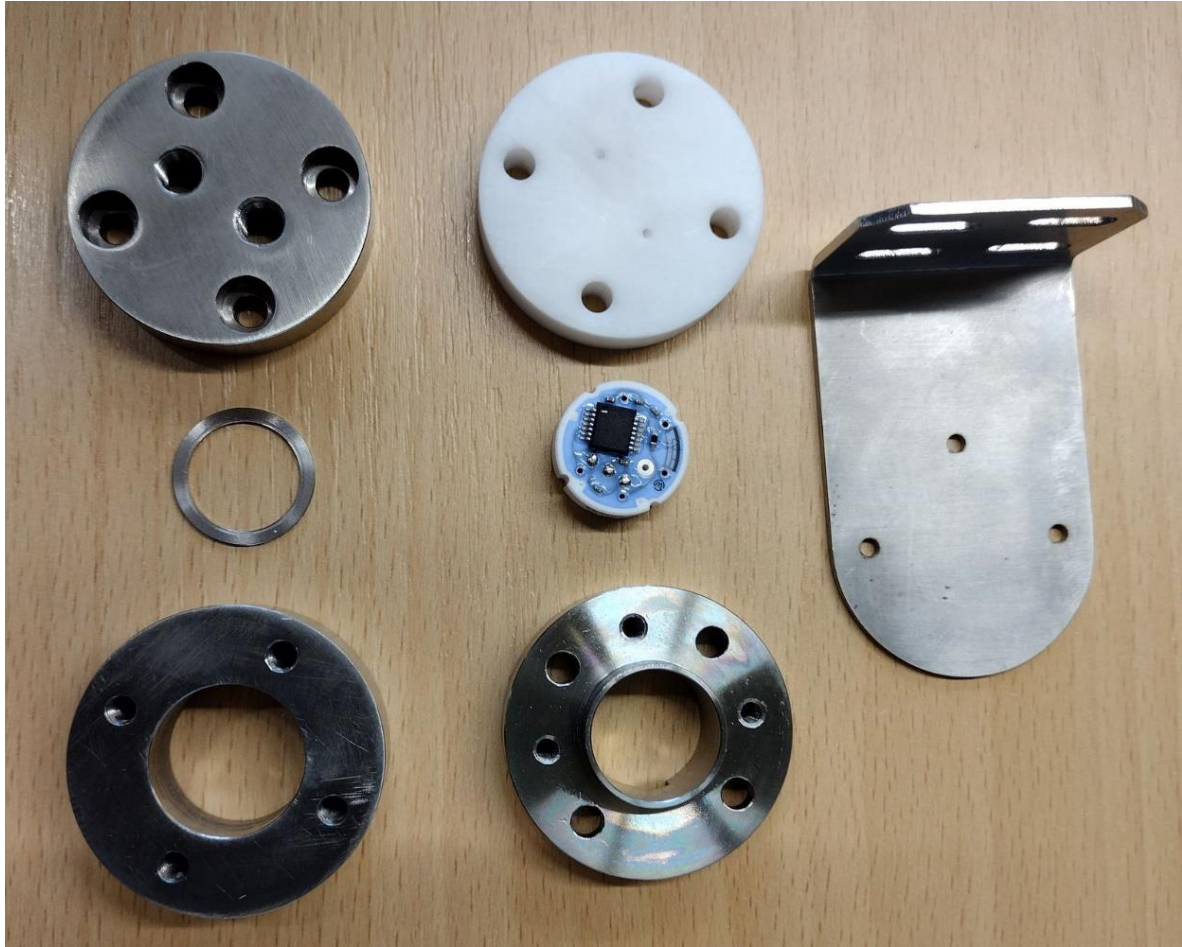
Parts machined from 316 stainless steel and PTFE obtained from Xometry (first order) and ME780 sensor.
